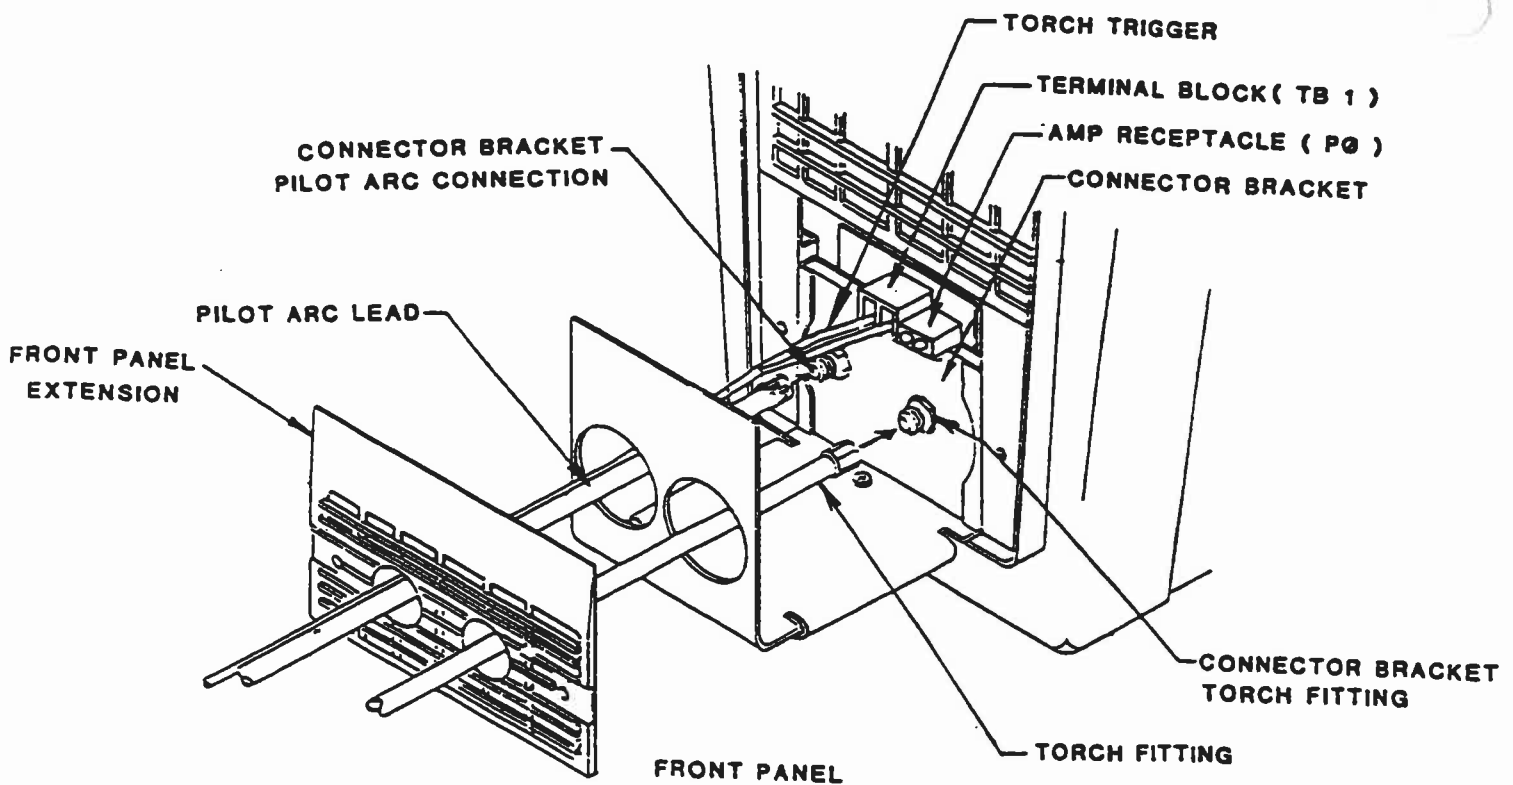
, TYPICAL WELDING & PLASMA CUTTING DIAGRAM
